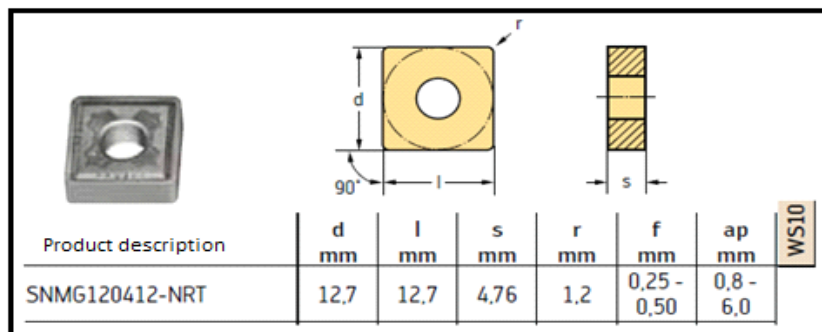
Cutting tool geometry and technical information of uncoated carbide insert
